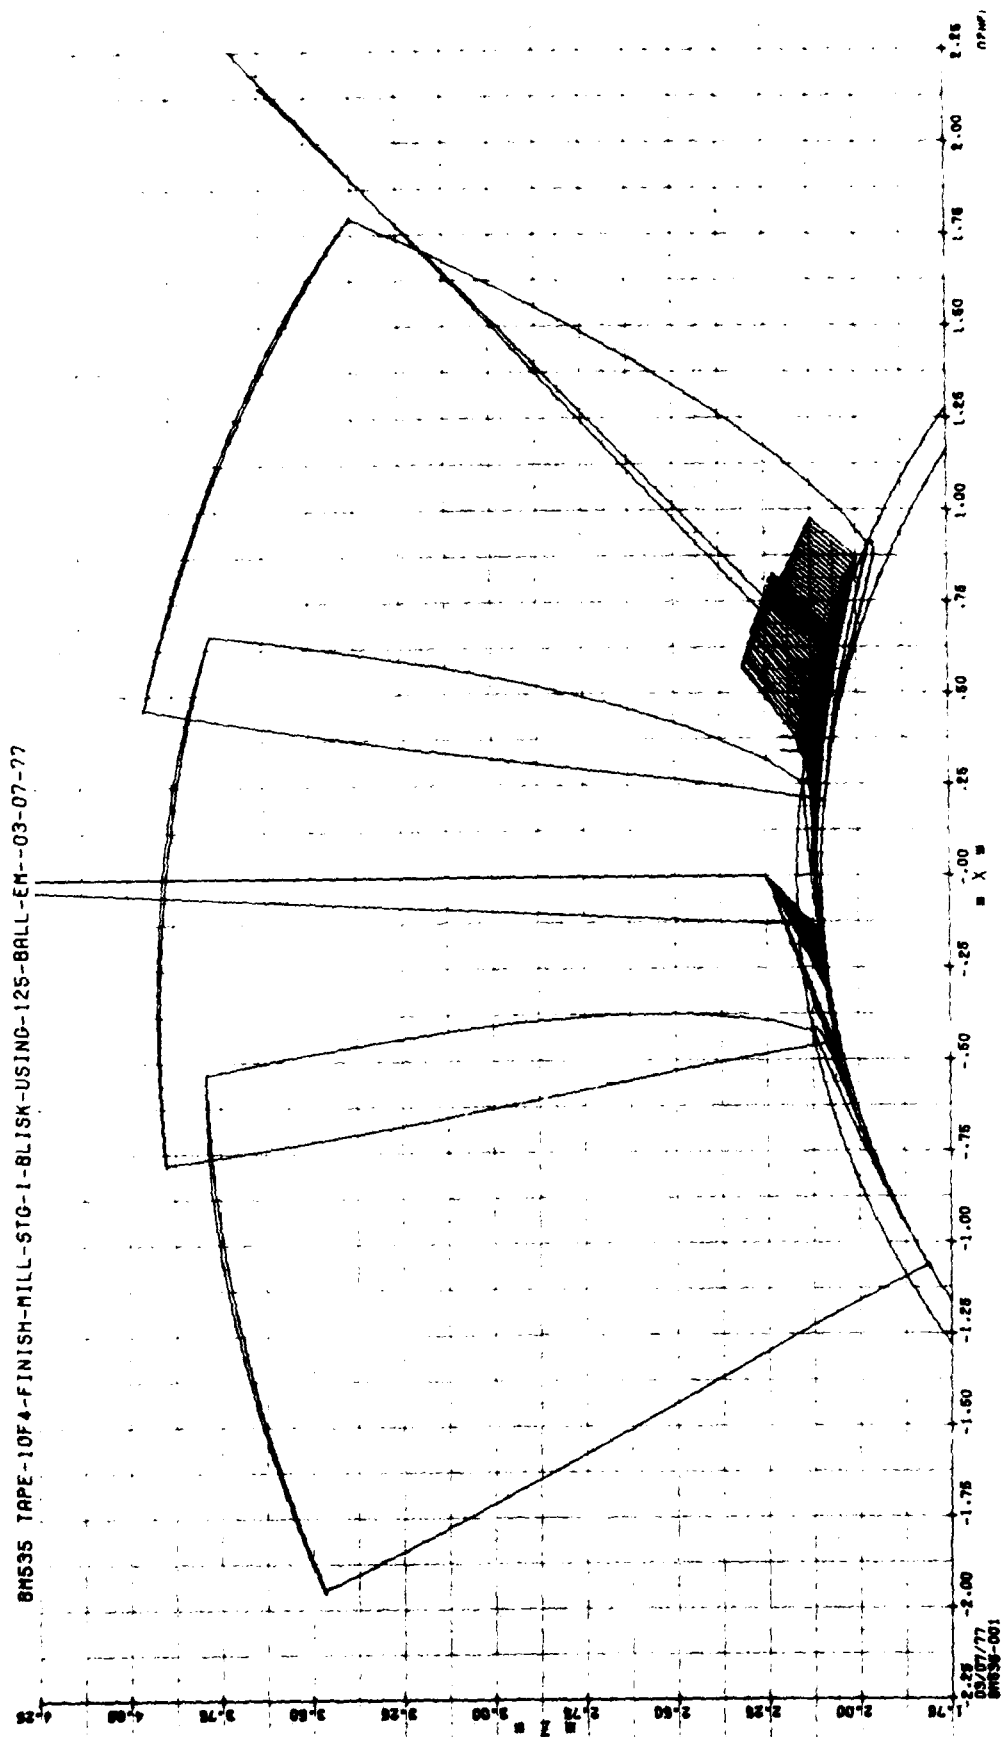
Computer Plot of Tool Paths to Finish Machine Platform.
